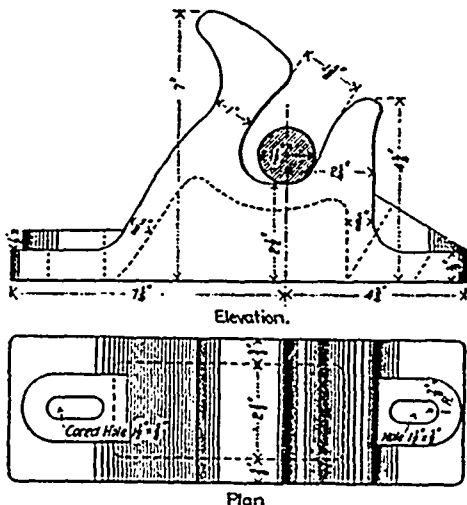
CASTINGS FORMING HINGE SUPPORT OF RACK FOR PROTECTING THE TURBINES OF THE LACHINE RAPIDS POWER PLANT.
